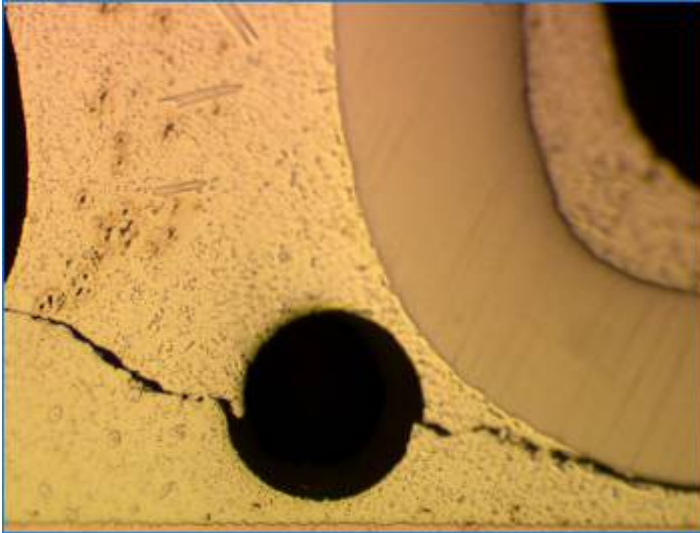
cross section, SN66, U62, right lead solder crack and void, 200xb
